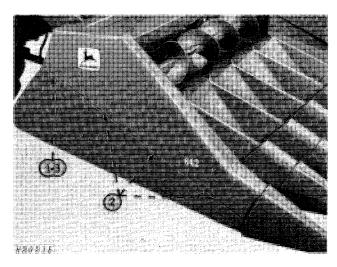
Installing 642 and 842 Corn Head Wheel Shields
